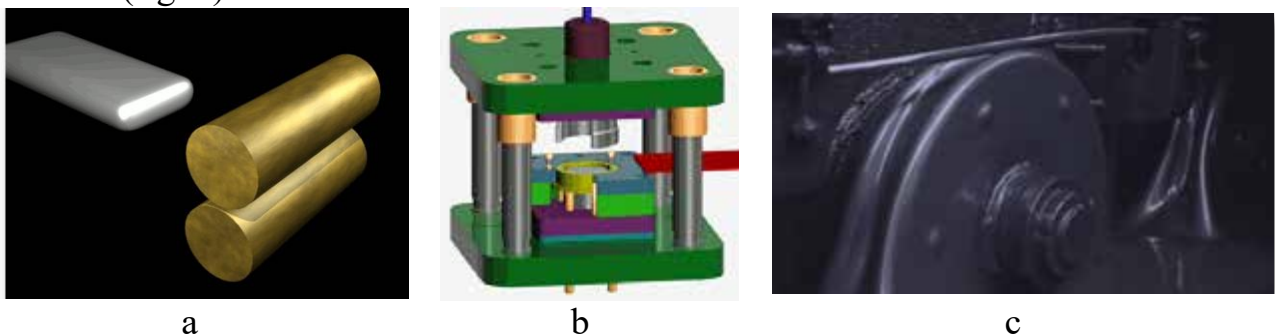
Forming methods: rolling (a), punching (b), drawing (c)
